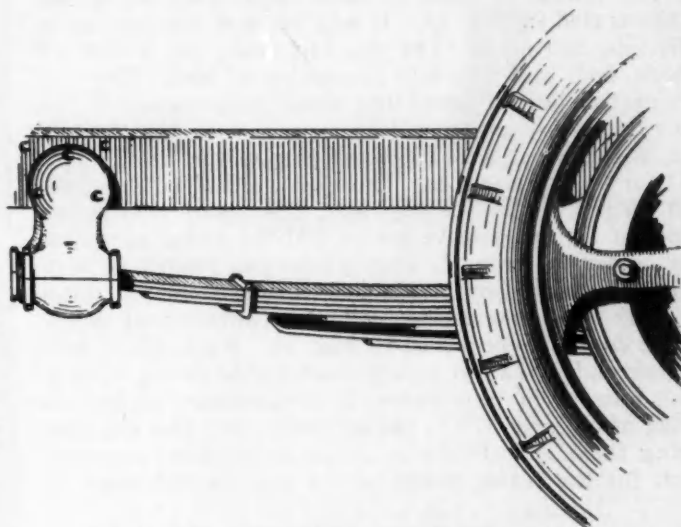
THE TYPE-J PROGRESSIVE SPRING ARRANGEMENT
